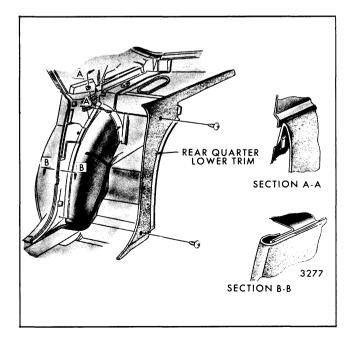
Quarter Trim Assembly Attachment - "A, B and X" Four-Door and "A-80" Styles
